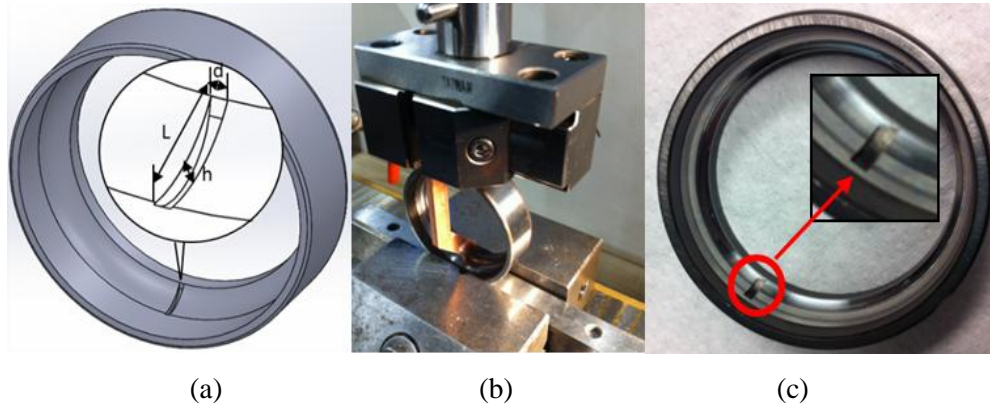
(a) A line-spall defect (b) Seed defect with EDM (c) 1.530mm outer race defect.
